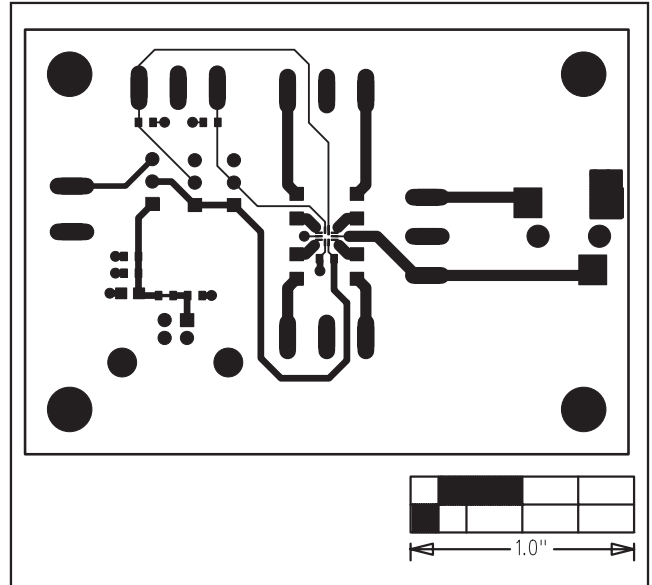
MAX14535E EV Kit PCB Layout—Component Side
